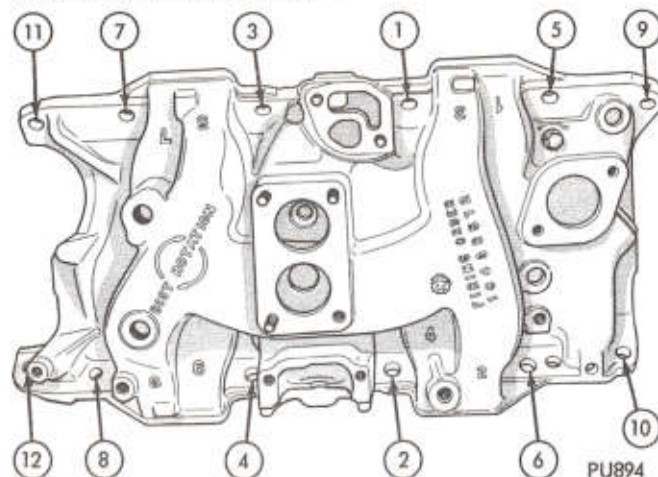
Intake Manifold Screw Tightening Sequence (Typical)
